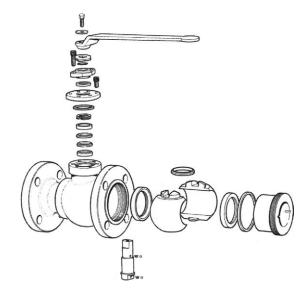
One-piece body cast ball valve *Courtesy of Tyco Flow Control
